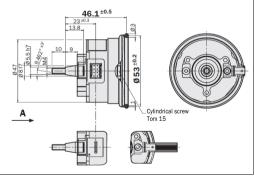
Dimensional drawing of SRS50S/SRM50S, conical shaft, rubber support
